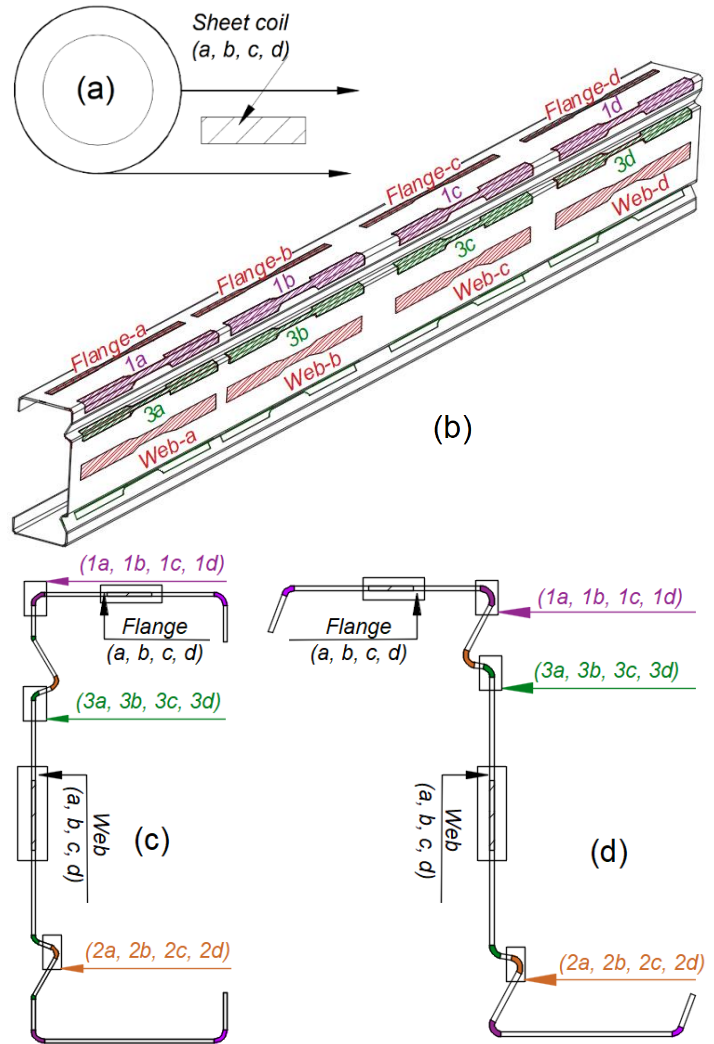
Locations of extracted tensile specimens (a) sheet coil prior to cold roll forming process, (b) longitudinal channel section, (c) channel cross-section, and (d) zed cross-section.
